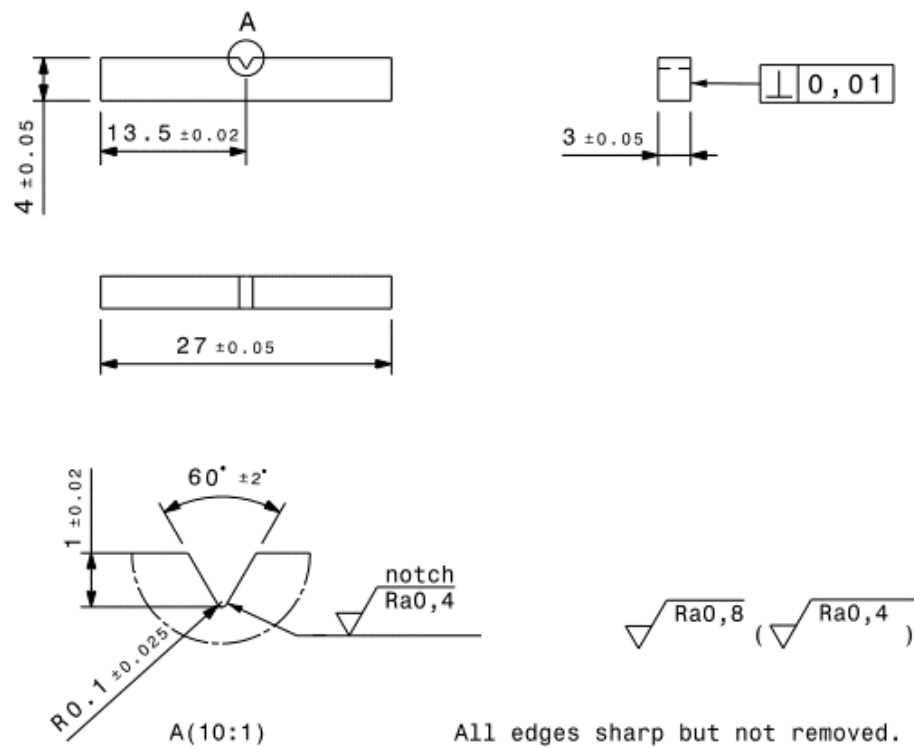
Drawing of a KLST type sub-sized Charpy-V impact specimens
